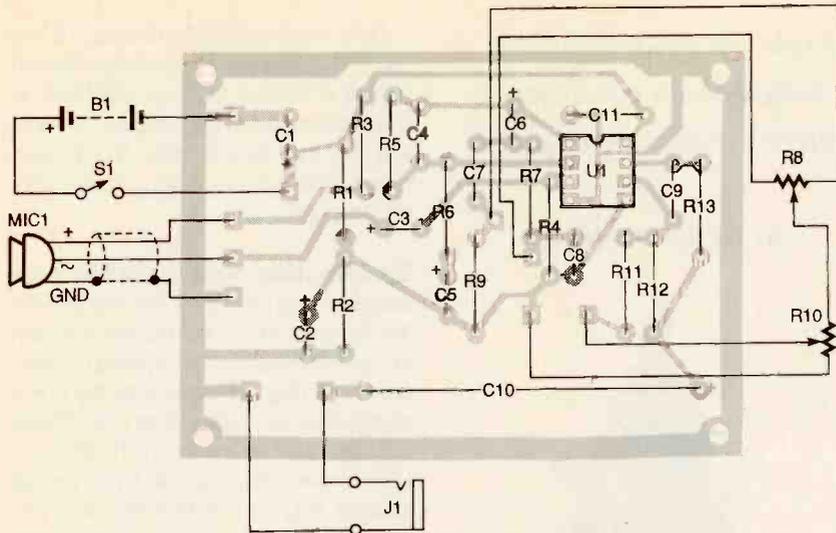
Use this parts-placement diagram as a guide when assembling the Stethoscope. Be sure to double check the alignment of the polarized components.
